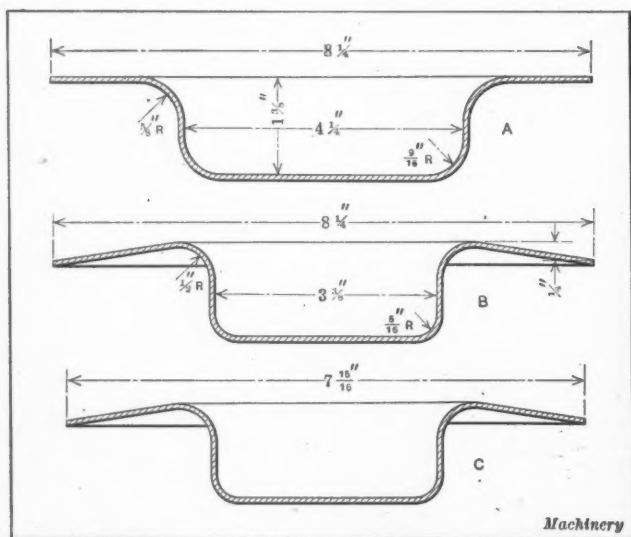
Appearance of Shell after Blanking and Drawing, Redrawing, and Trimming Operations
